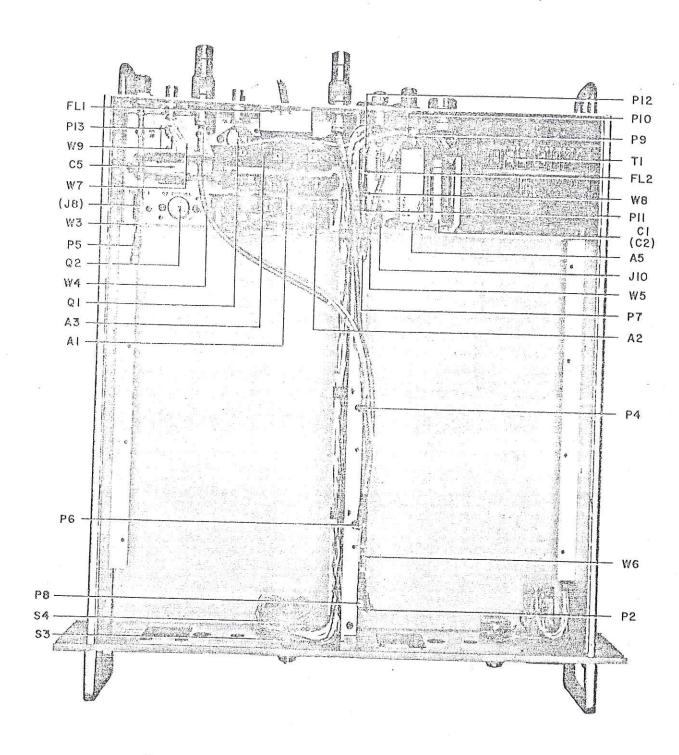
Type MTF-100A Microwave Tuning Frame, Top View, Location of Components.
